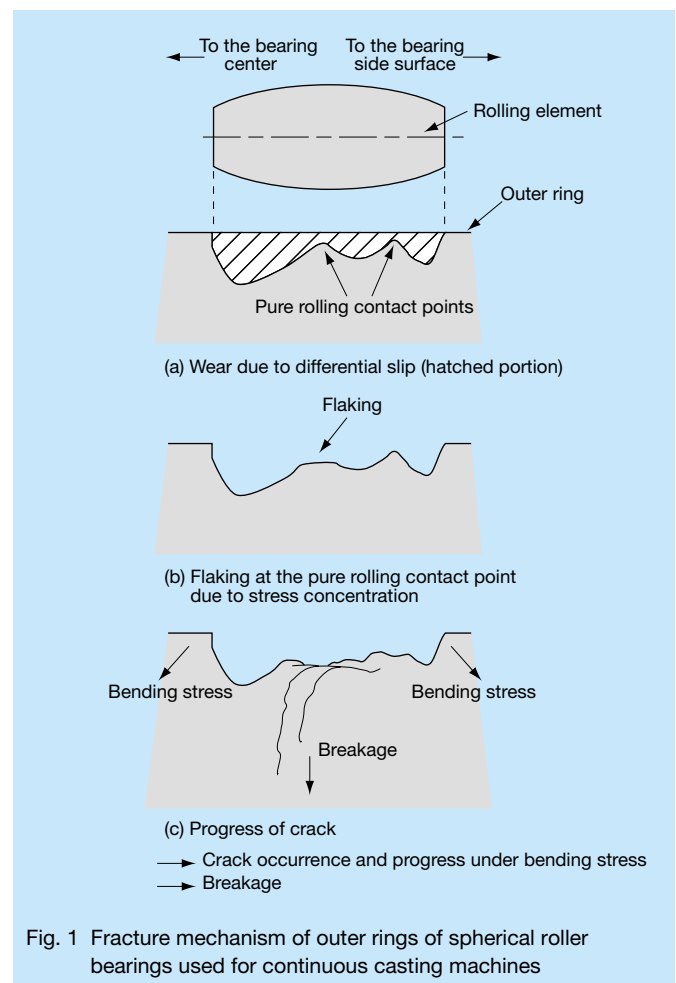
Fracture mechanism of outer rings of spherical roller bearings used for continuous casting machines
